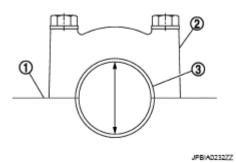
Identifying Main Bearings And Cylinder Block Courtesy of NISSAN MOTOR CO., U.S.A.
